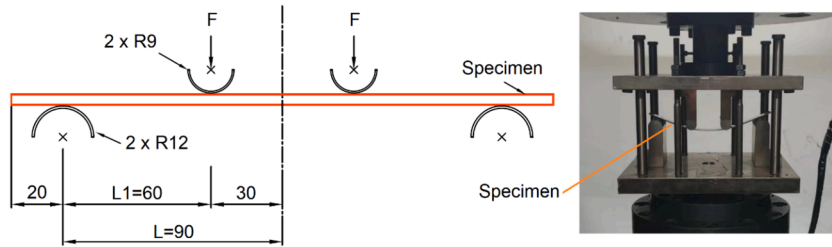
Dimensions (mm) and setup of the four-point bending CAF tests.
